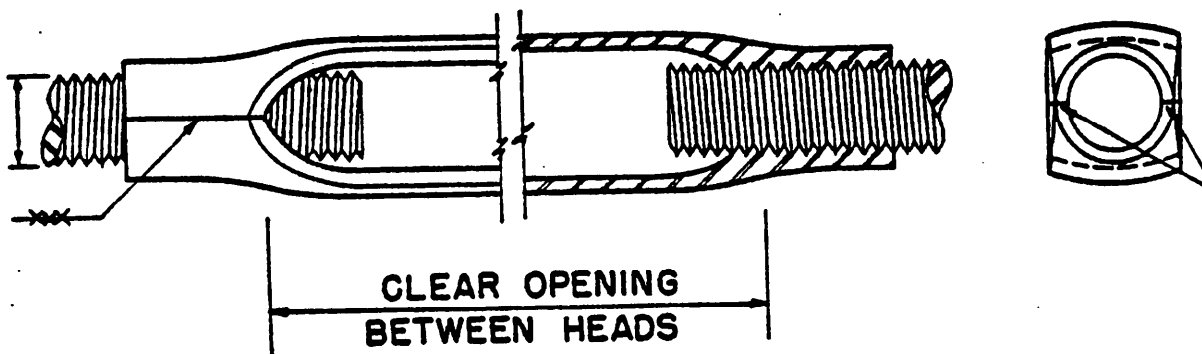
Type I, form 3, open turnbuckle body, resistance welded.
